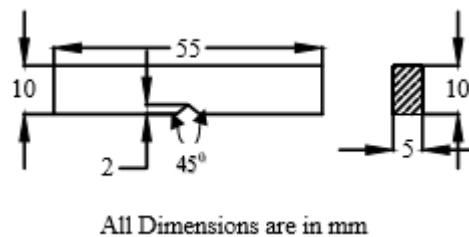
Dimension of Charpy V-notch impact test specimen
